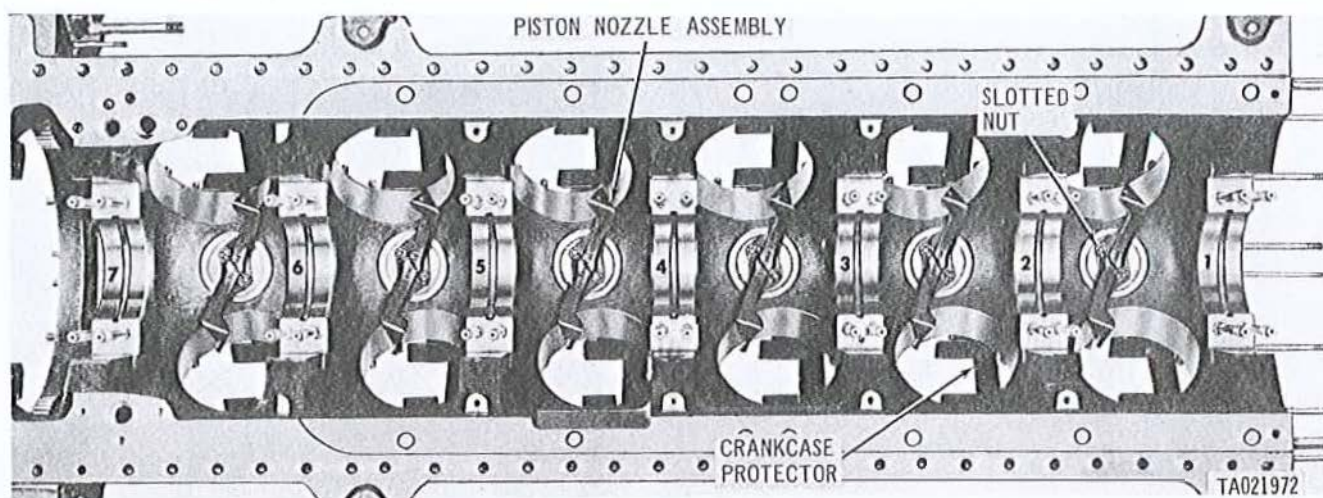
Removing or installing piston oiler nozzle assemblies.
